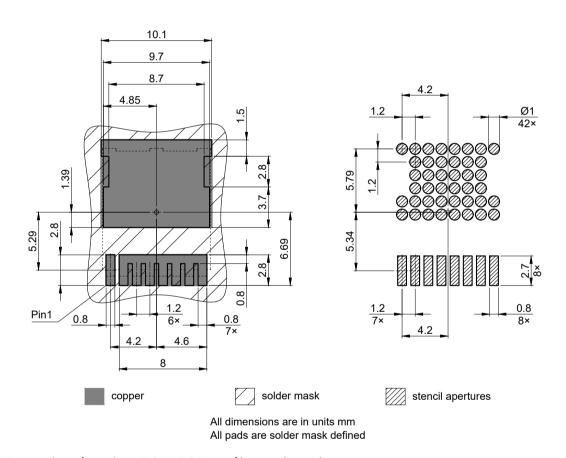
Footprint drawing PG-HSOF-8, dimensions in mm
